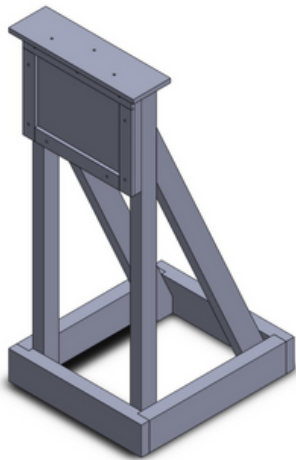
Example of a CAD Drawing of the *Mini Kiosk
